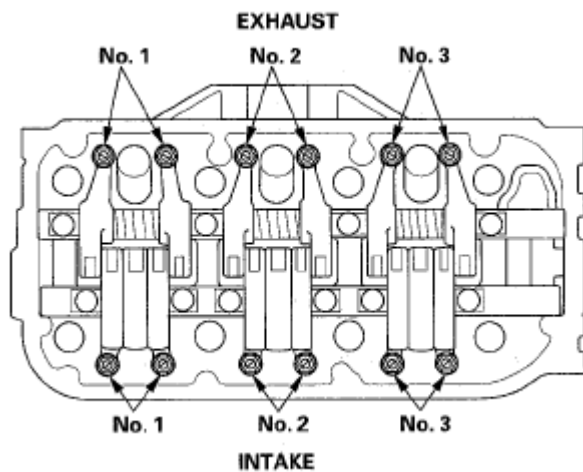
Identifying Intake And Exhaust Valves - Rear
